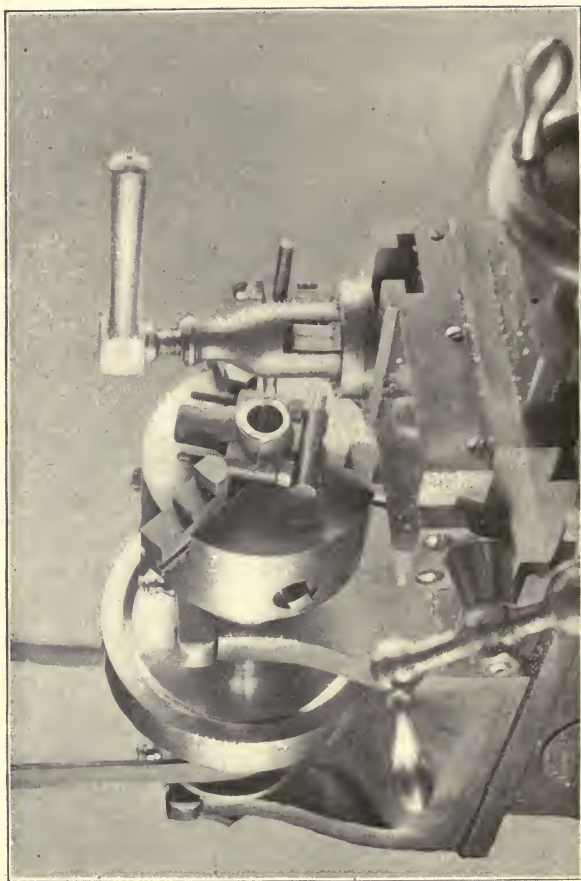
BORING CONNECTING ROD HEAD TO FIT CRANK PIN.
